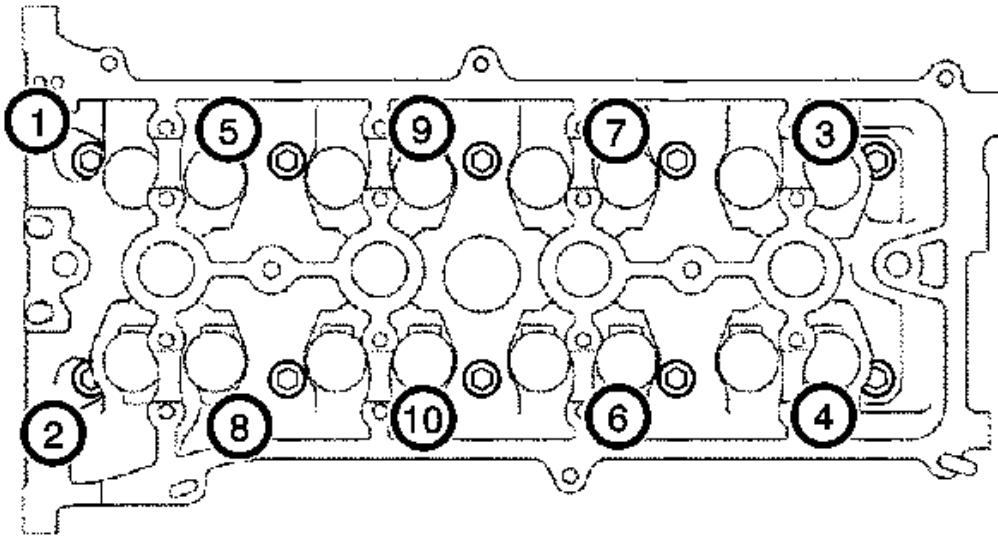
View Of Cylinder Head Bolt Loosening Sequence
